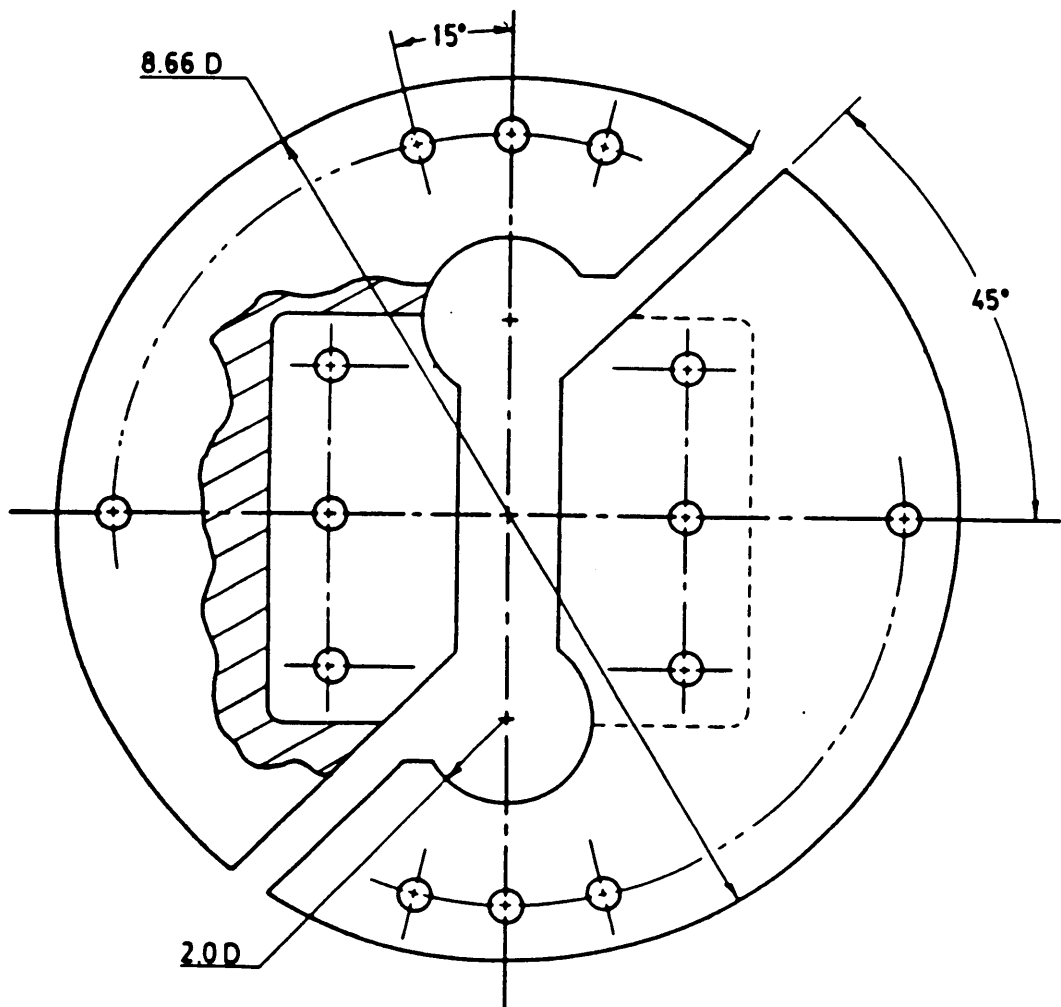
Front View of The Load Fixture Used to Grip Arcan Specimen During Testing [10].
